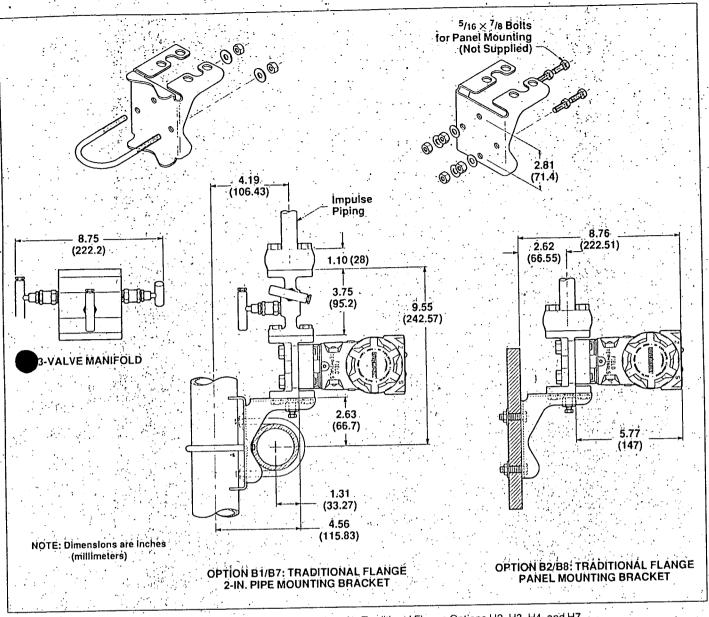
Optional Mounting Brackets for Traditional Flange Options H2, H3, H4, and H7.
